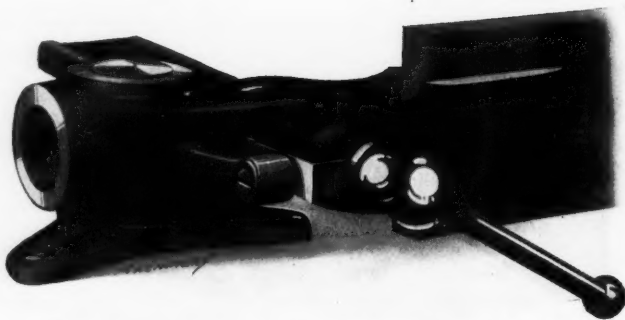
Will-Burt Vise holding Work in Horizontal Position
